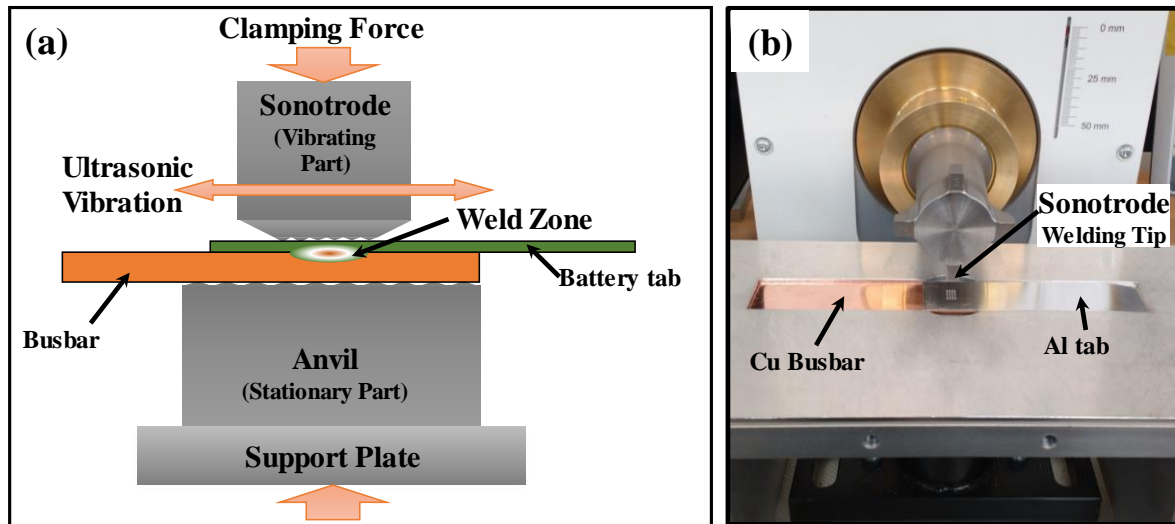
Ultrasonic metal welding (a) illustration of welding principle, and (b) tab-to-busbar joining set-up.
